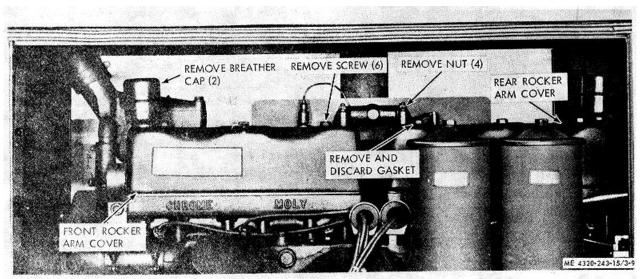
Breather connection and rocker arm cover, removal and installation.
